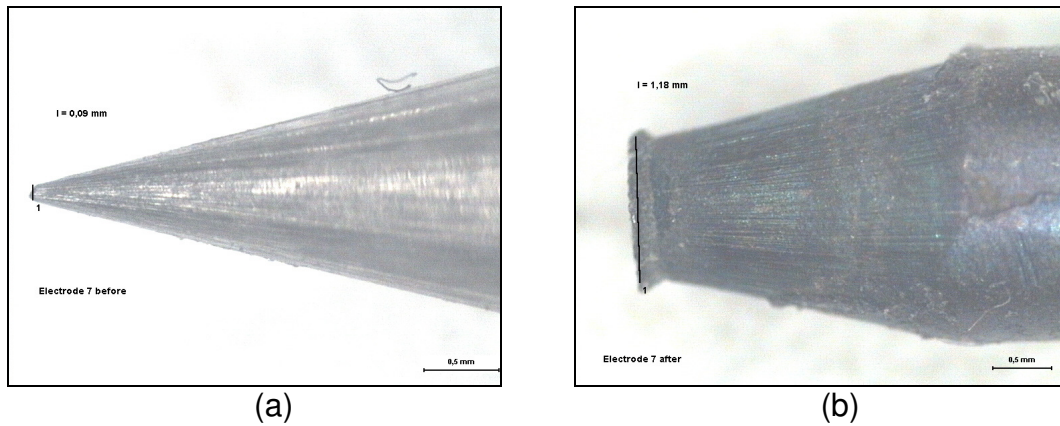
Angle of Electrode 7 used for experiment number 7: (a) before welding $\leq 30.61^\circ$; (b) after welding $\leq 44.86^\circ$.
